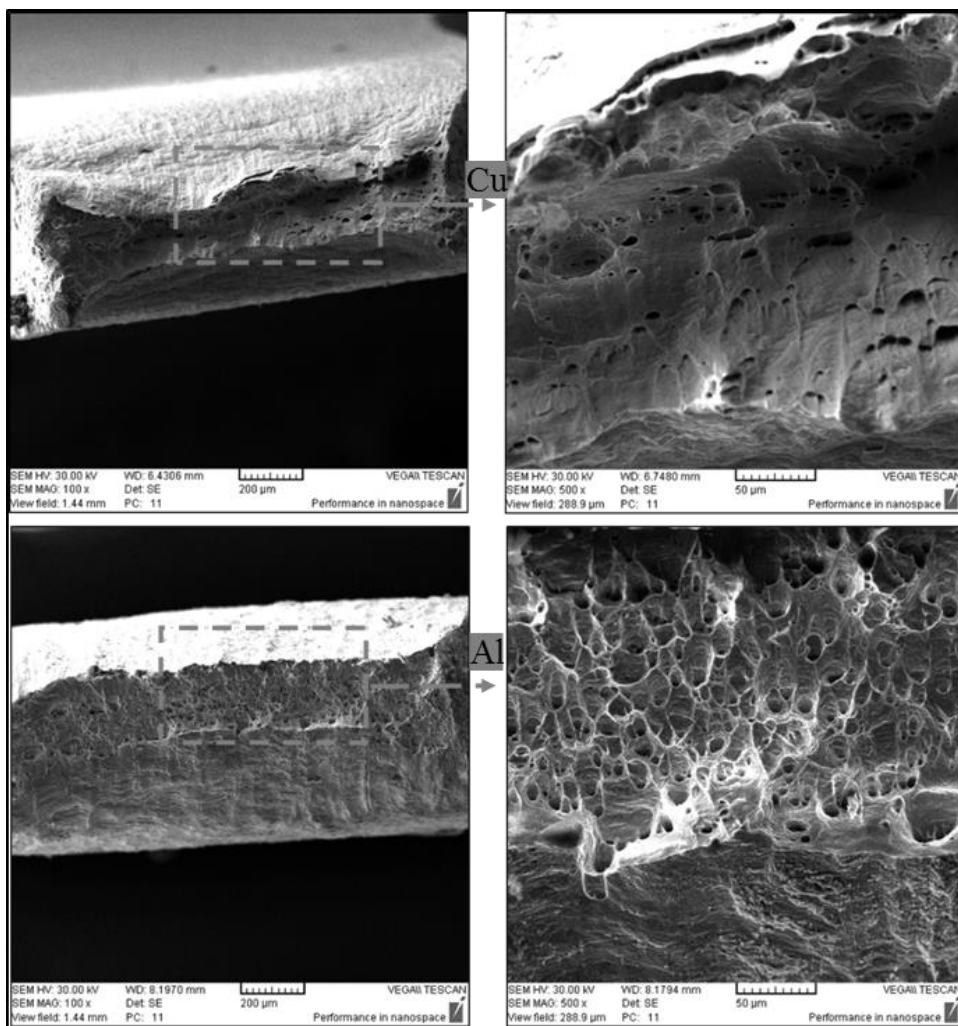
Tensile fracture surfaces of initial sheets
